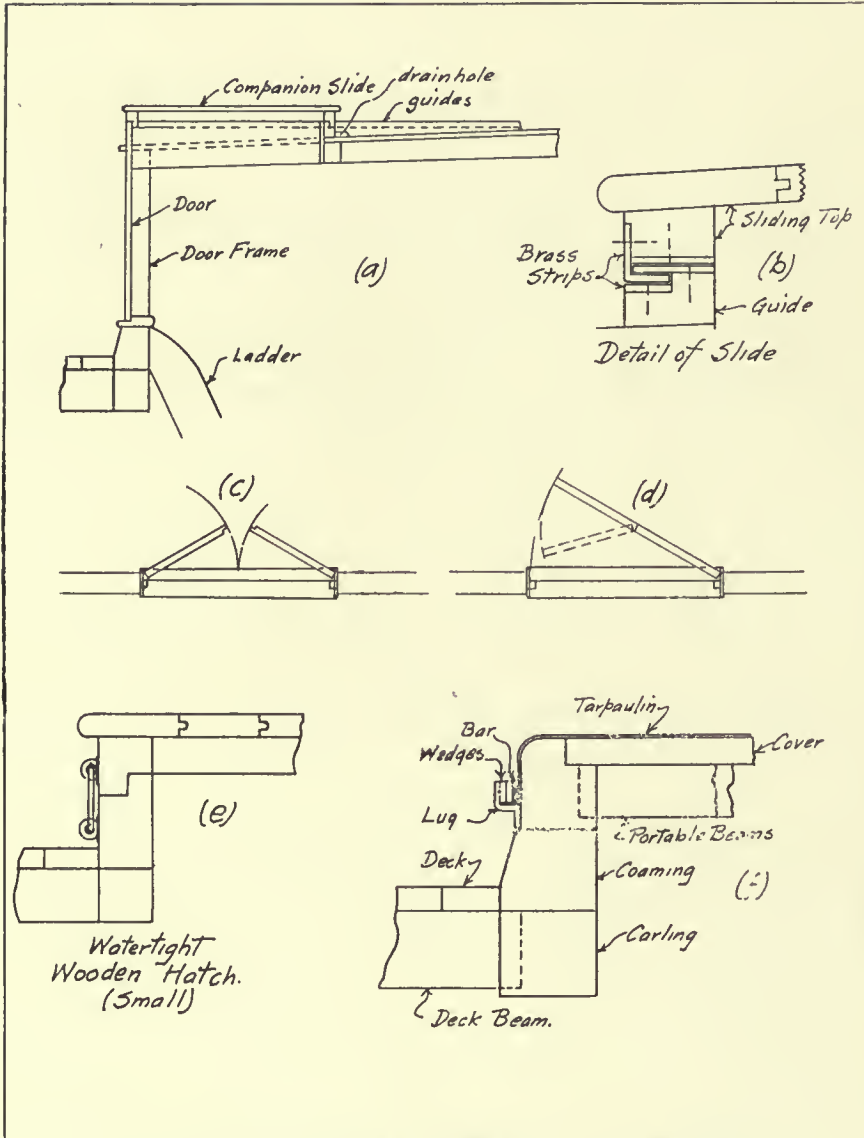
DETAIL CONSTRUCTION OF COMPANION SLIDES AND HATCHES
